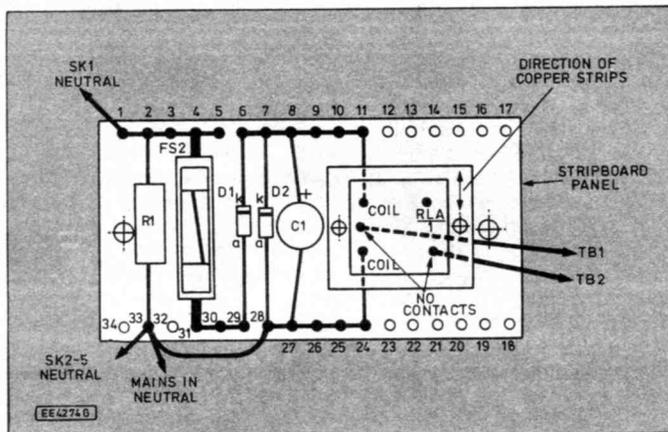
Tagboard component layout, positioning of relay board and wiring (using 6A mains rated wire) to relay contacts directly.
